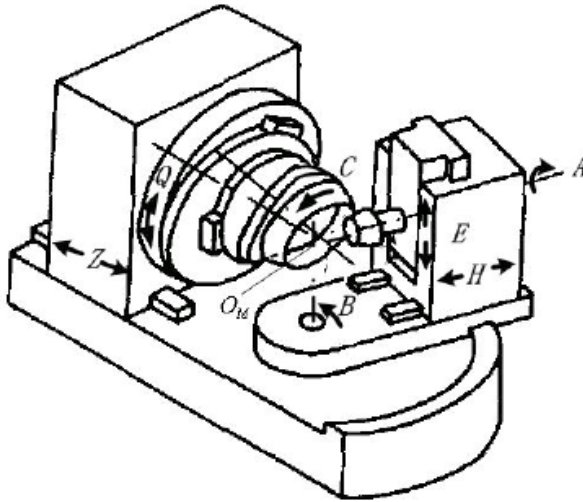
Traditional Mechanical Shaking Table Machine Tool
